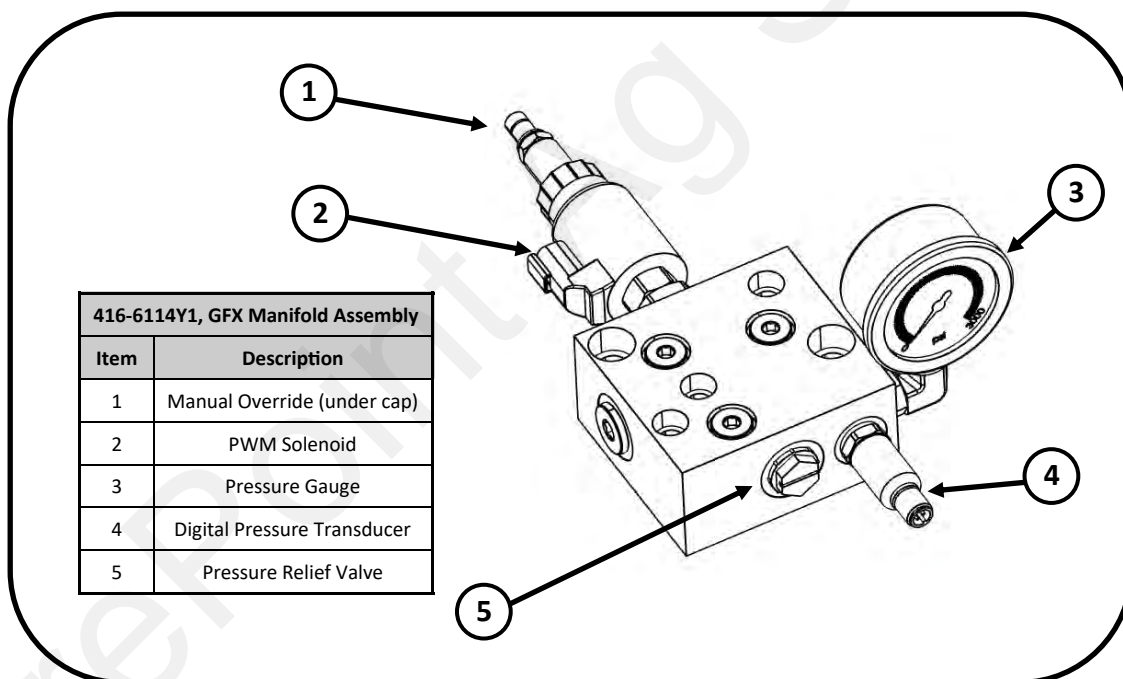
416-6114Y1, GFX Manifold Assembly
